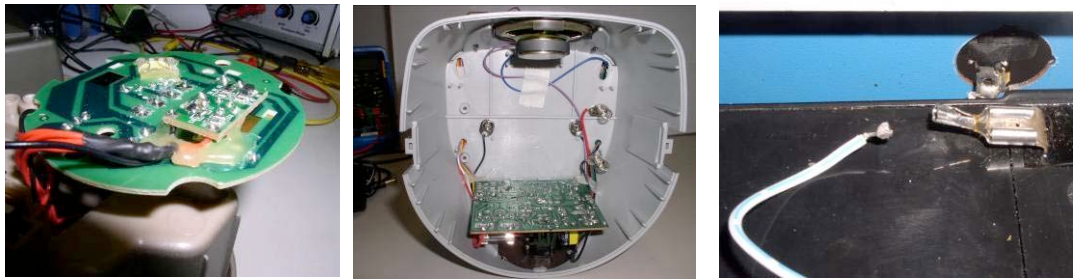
Components fixed with hot glue (*left*); with tape (*center*); a badly crimped wire (*right*)
